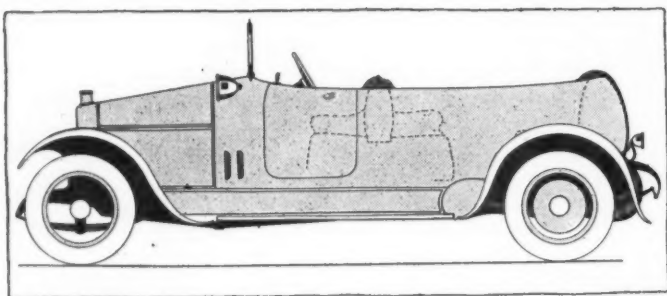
Streamline body with Pullman seats that can be arranged to make a bed.
